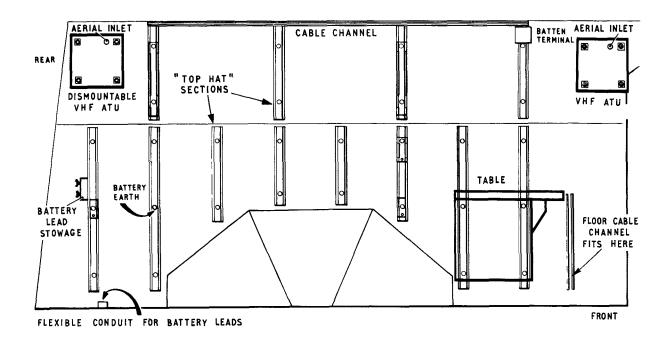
BRACKETS AND EQUIPMENT MOUNTED ON THE LH WALL
